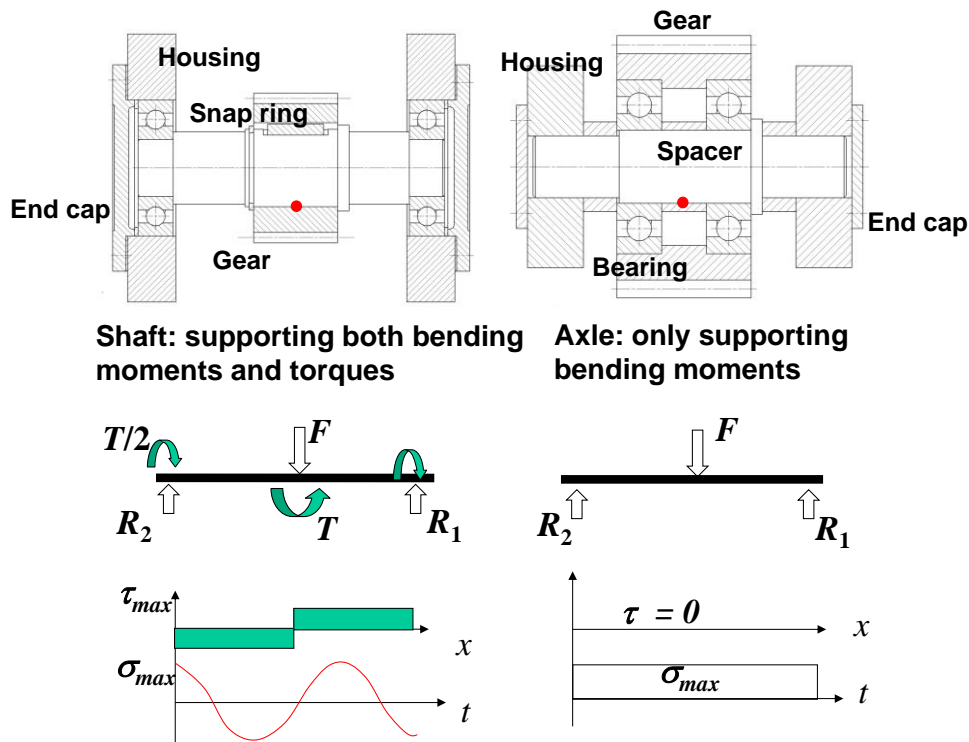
Shaft and axle. Note that end-cap bolts are not shown here in the structure drawings.
